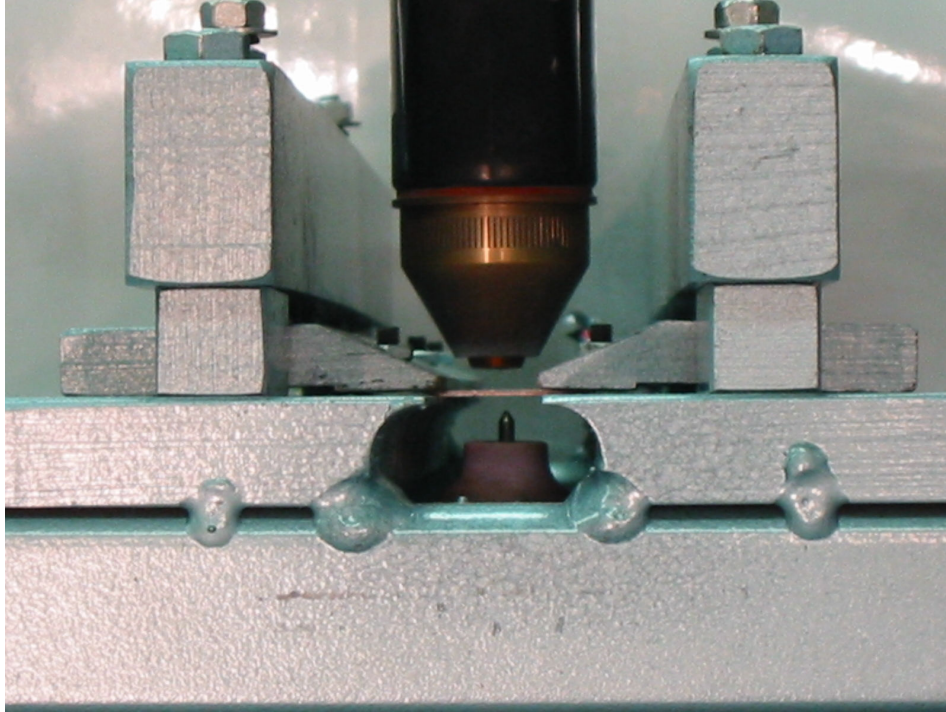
The clamping bars used to hold the specimens between the top PAW torch and the bottom GTAW torch (taken from Kwon [29]).
